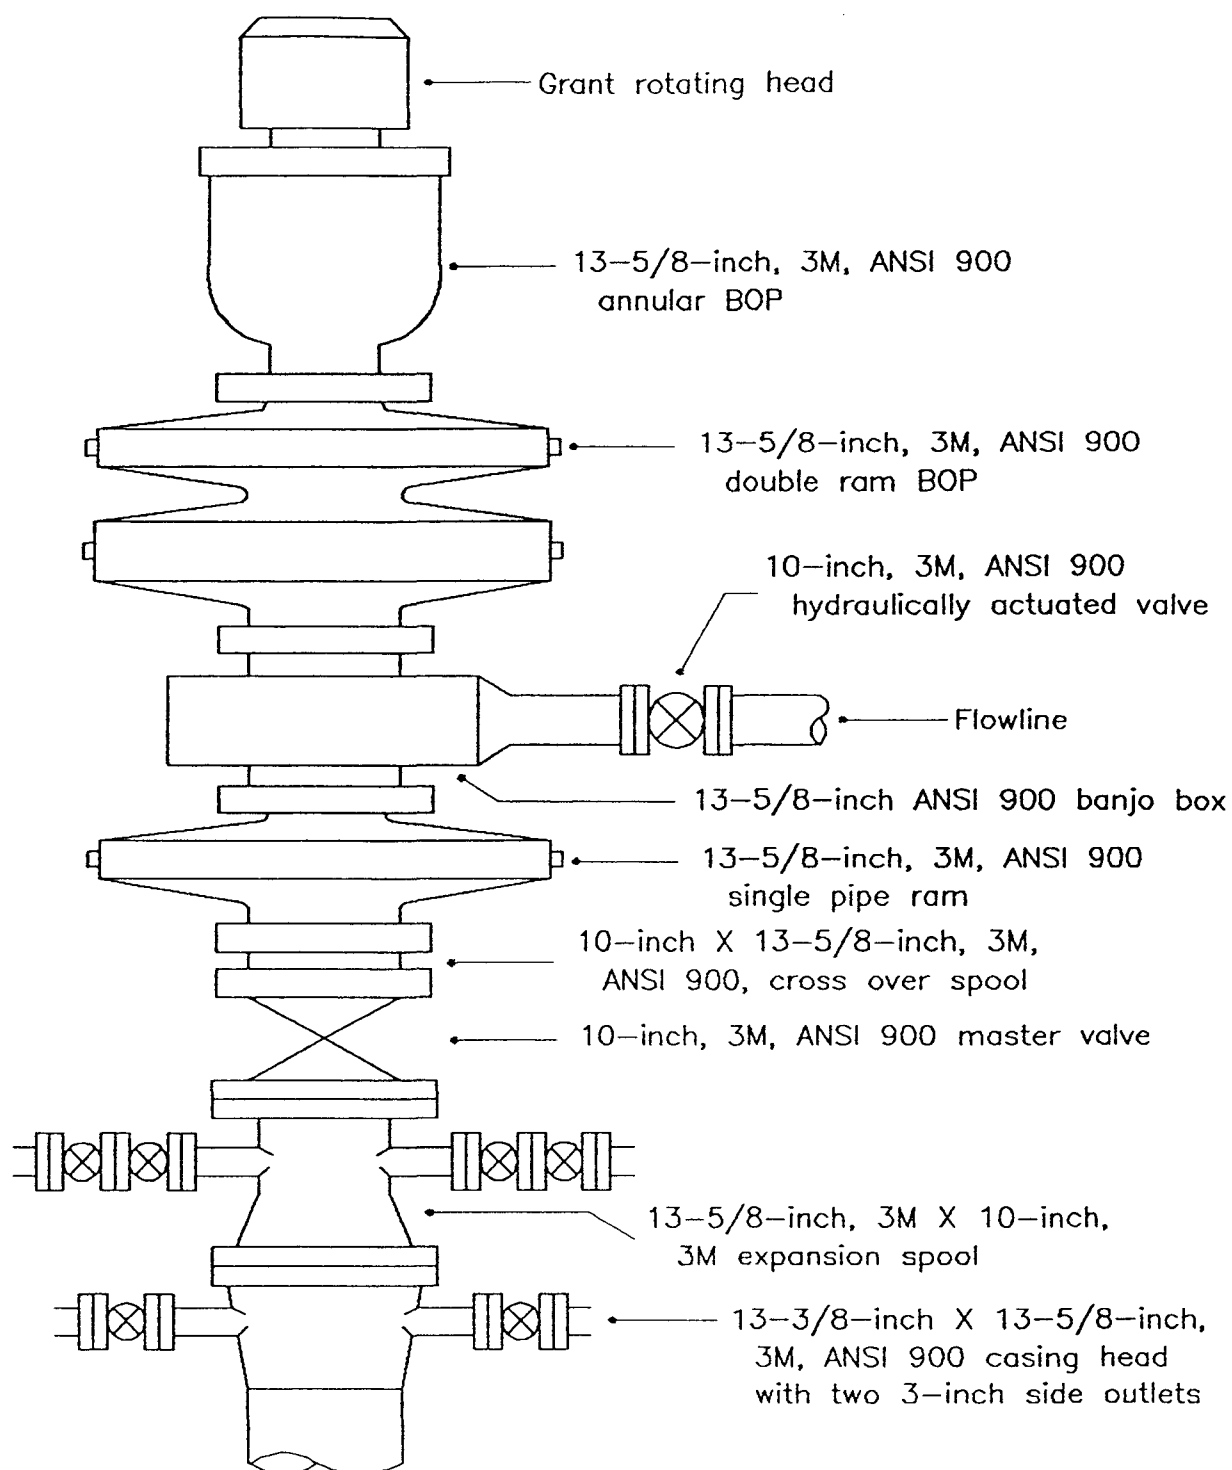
BOP for use on 13-3/8-inch casing string – air drilling below 4,000'.
